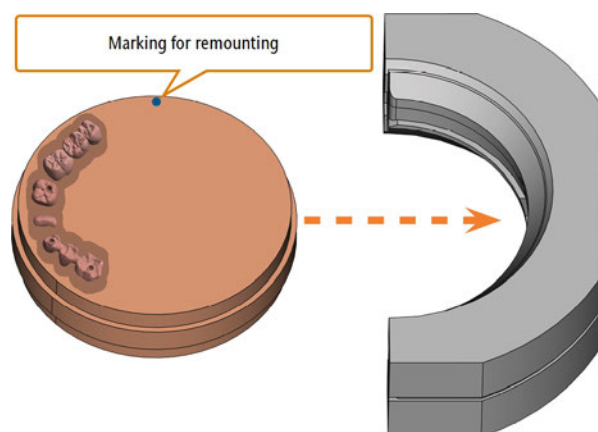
REMOUNTING AN ALREADY PROCESSED DISC TO THE BLANK HOLDER (MARKINGS FOR SAFER REMOUNTING IN BLUE)
